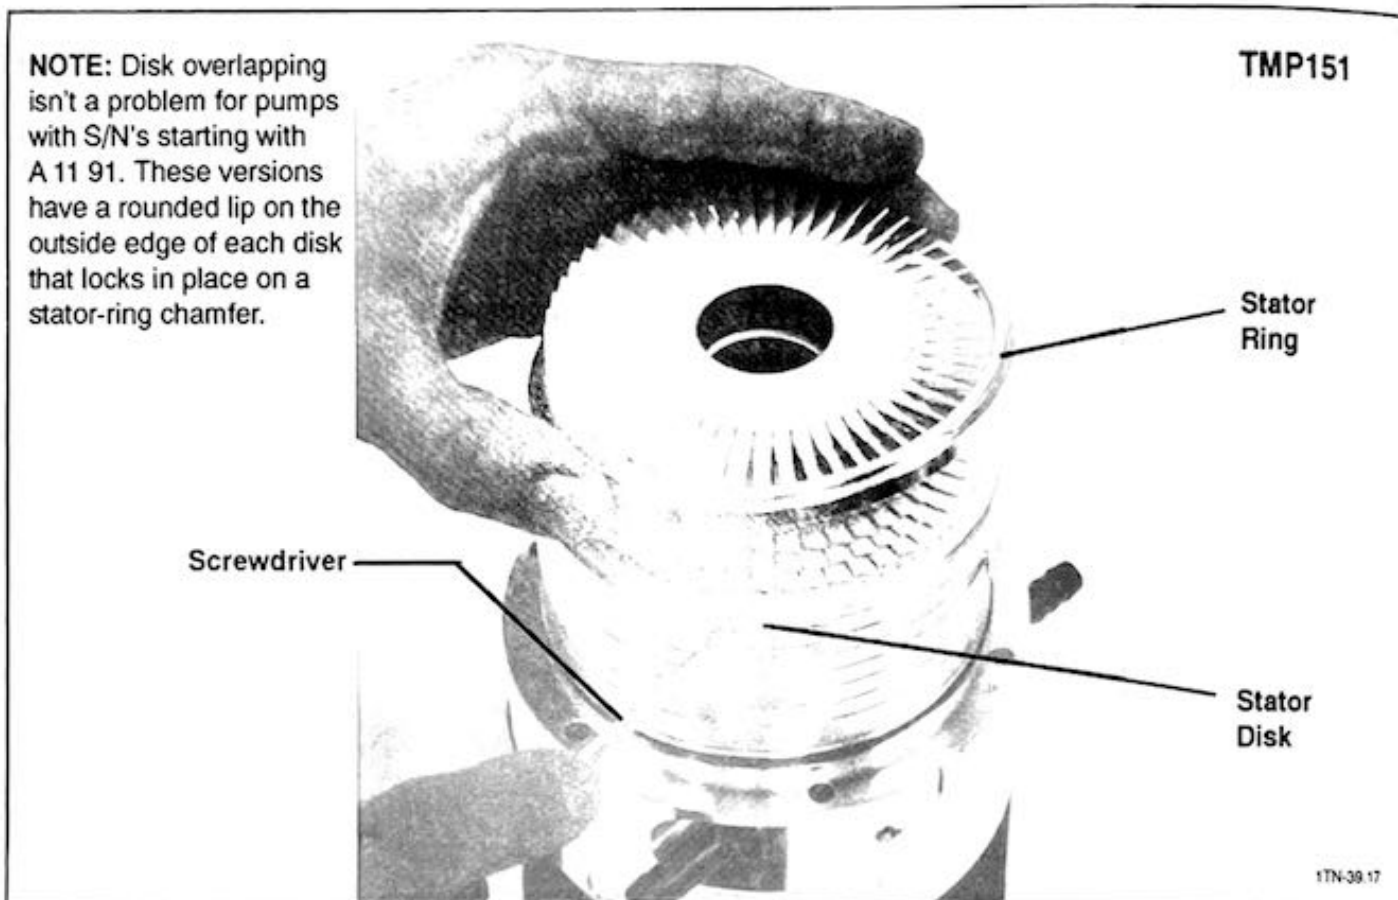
Using a Screwdriver to Prevent the Stator-Disk Halves from Overlapping as You Install the Stator Ring
